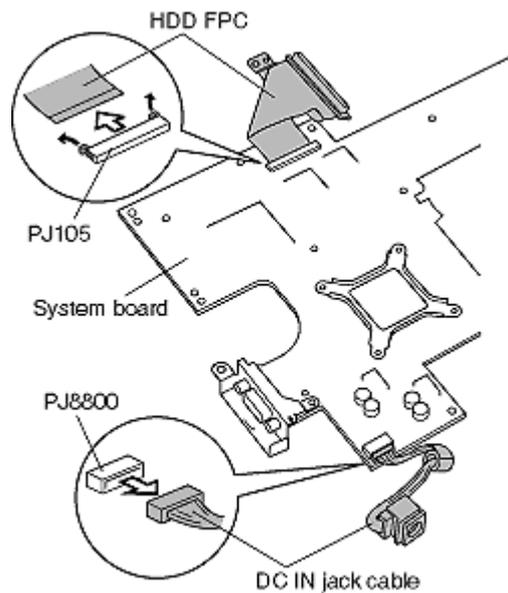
Removing the HDD FPC and the DC IN jack cable
